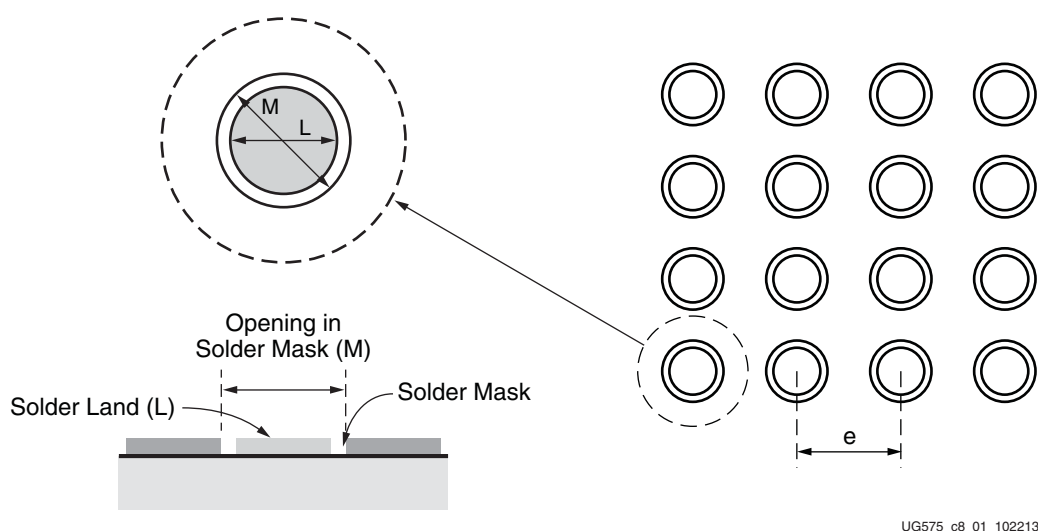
Suggested Board Layout of Soldered Pads for BGA Packages
